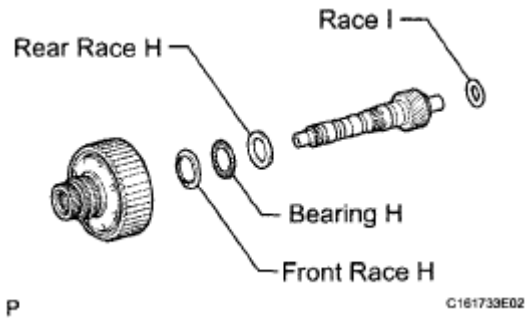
Identifying Thrust Bearing Races, Thrust Needle Roller Bearing And Planetary Ring Gear
